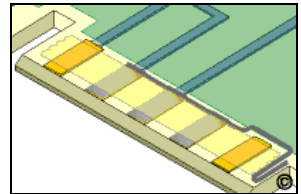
Apply Kapton Tape then apply Conductive Ink to the contacts that need plating.
